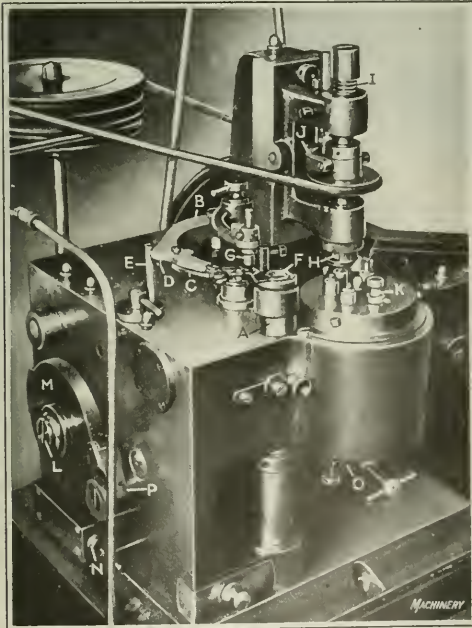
Machine for reboring the Central Hole in a Watch Wheel and cutting a Recess around the Hole
